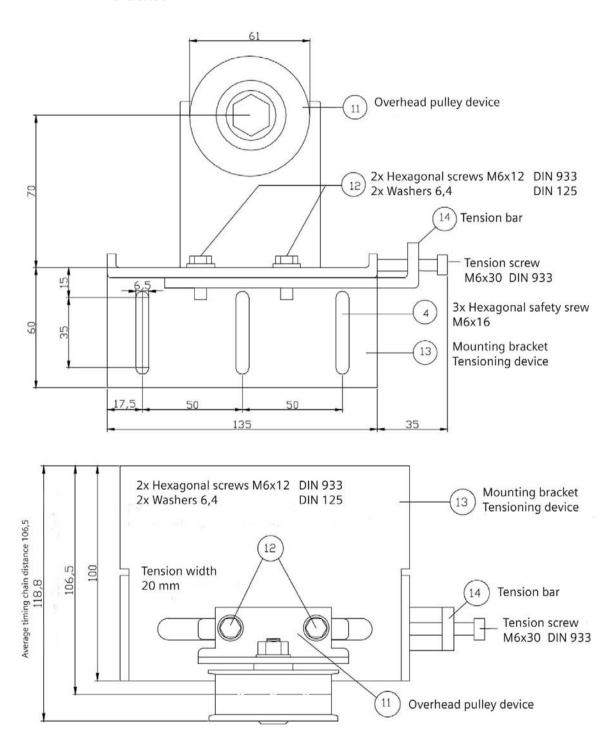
Deflector pulley with tensioning device and mounting bracket
